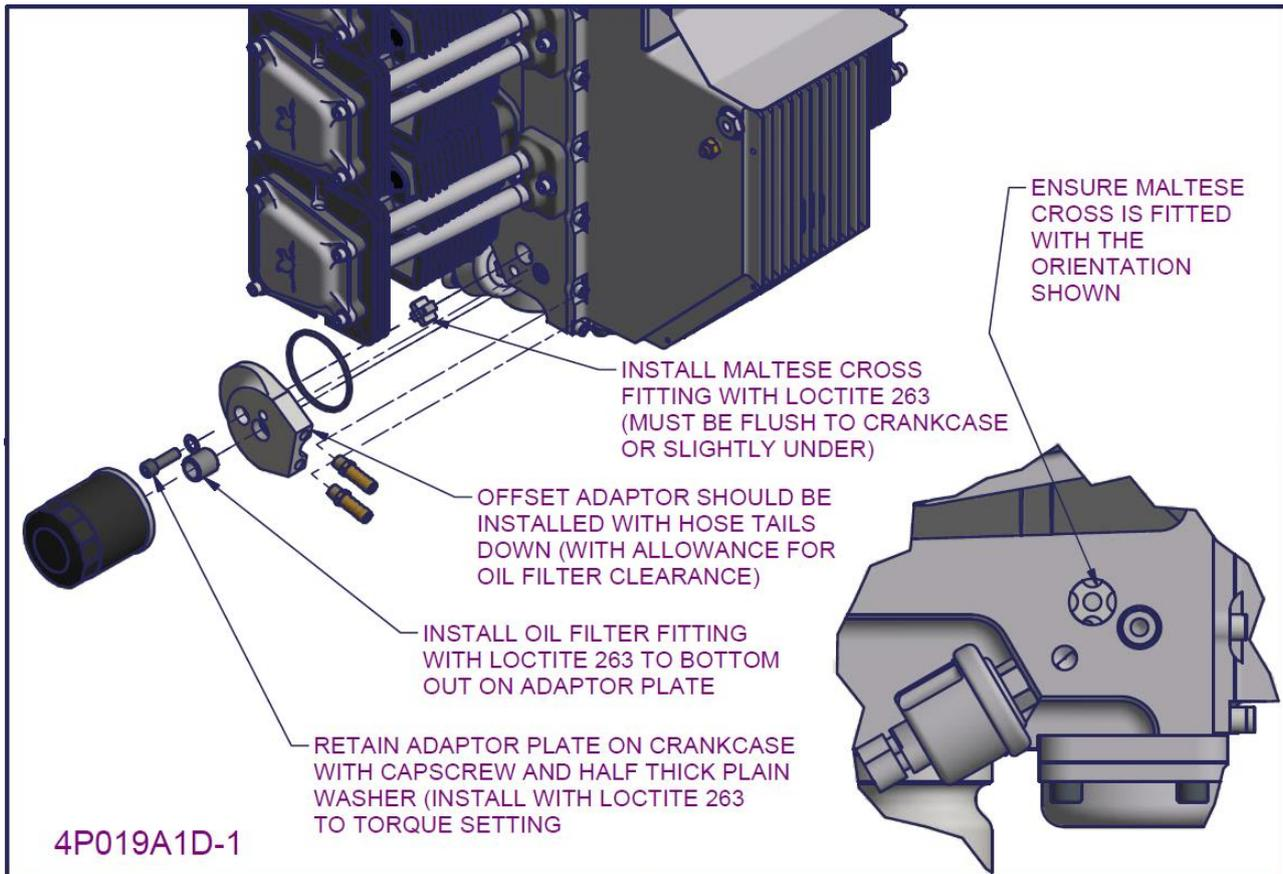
Reworked Billet crankcase oil filter adaptor installation
